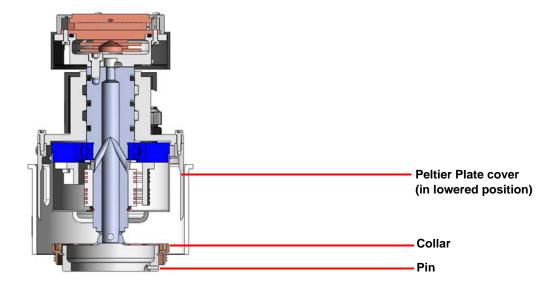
Peltier Plate alignment pin configuration (cross section shown for visibility)
